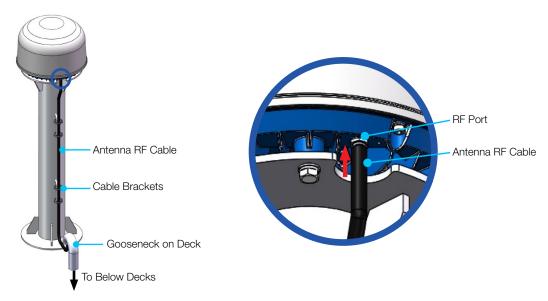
Connecting Antenna RF Cable using Outer Holes (with M10 Bolts)
